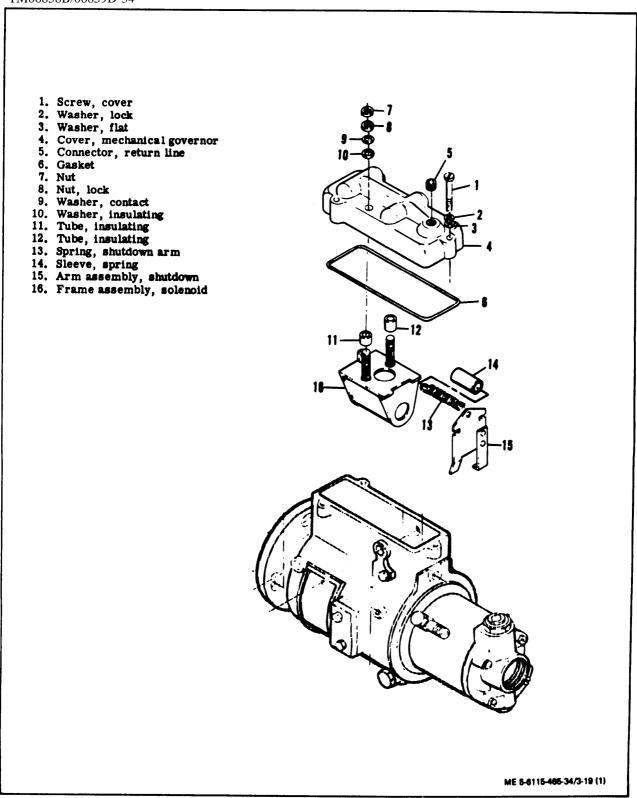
Fuel Injection Pump, Exploded View (Sheet 1 of 7)
